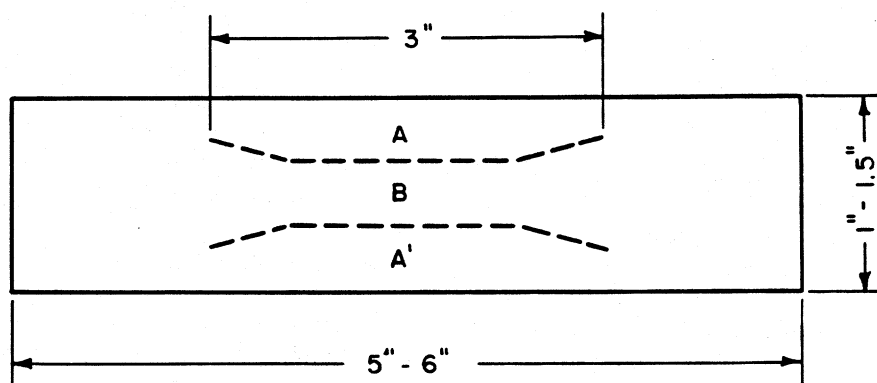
Specimen for comparative work; permitting tensile strength measurement on either original dimensions or dimensions after machine flexing.
